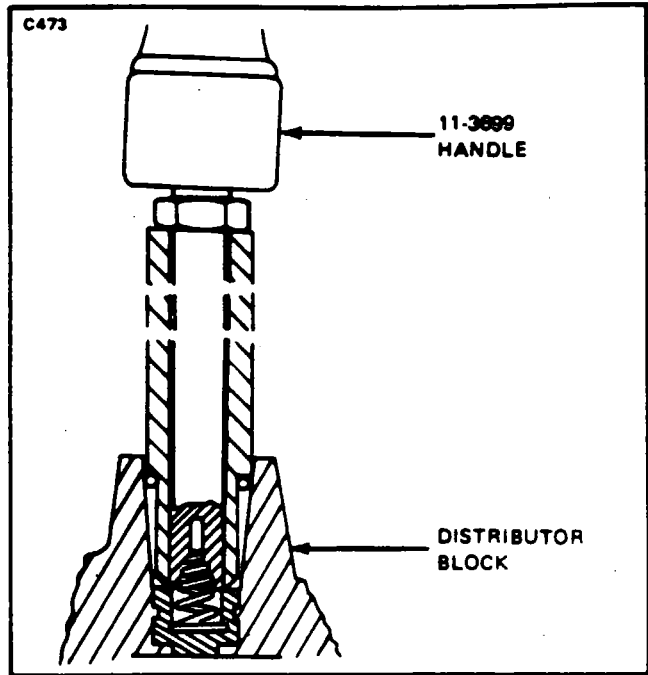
Position of 11-8627 Kit and Contact Spring after Installation
